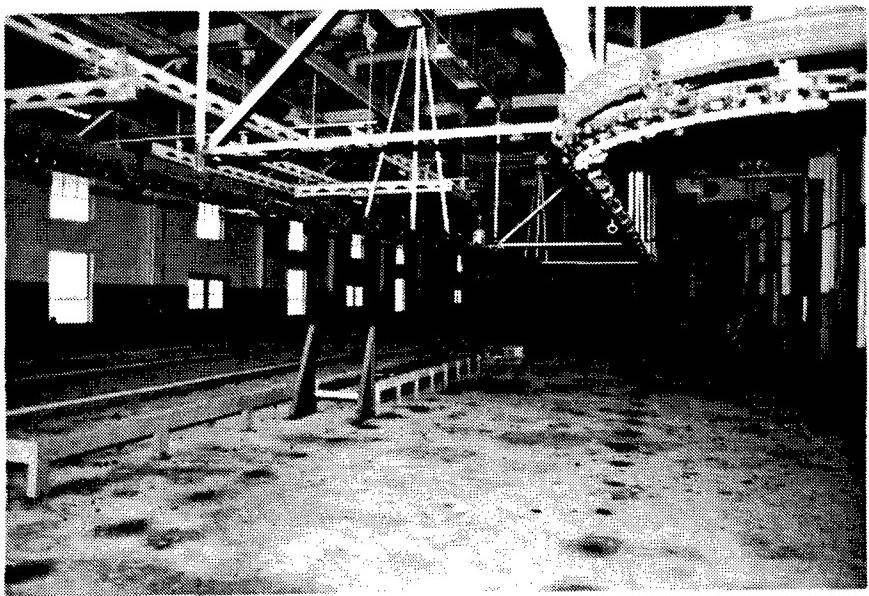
Building G-3: Interior view of this Receiving and Painting Building.
